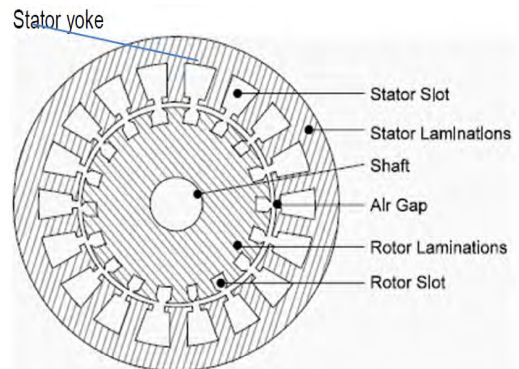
Dimensional structure of the stator and rotor for motor [7]
